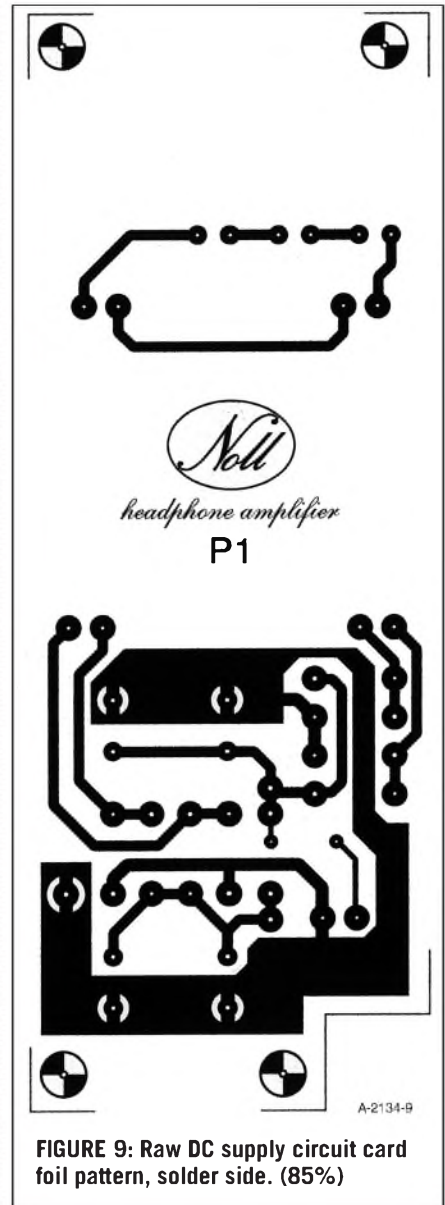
Raw DC supply circuit card foil pattern, solder side. (85%)
